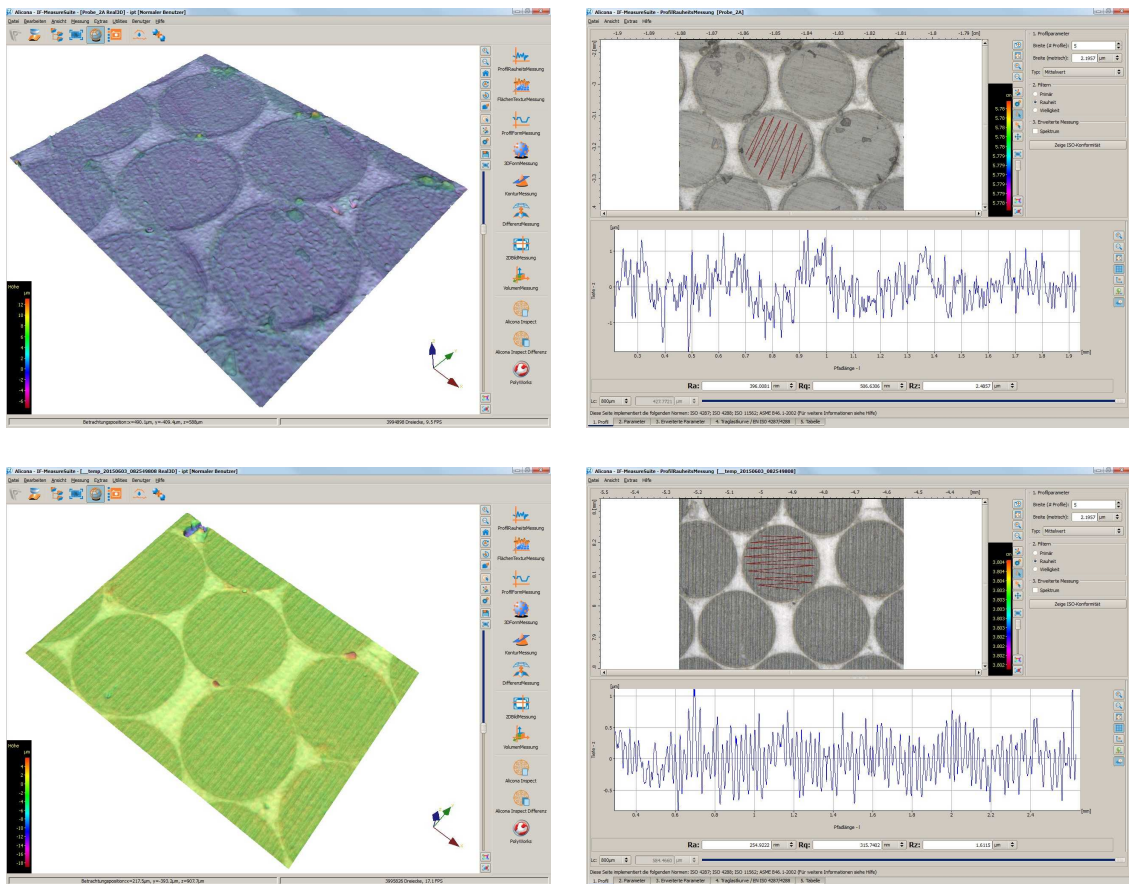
Measurement of surface roughness of fibres after the cutting with a saw blade (upper) in comparison to the cutting with a diamond milling head (lower).
